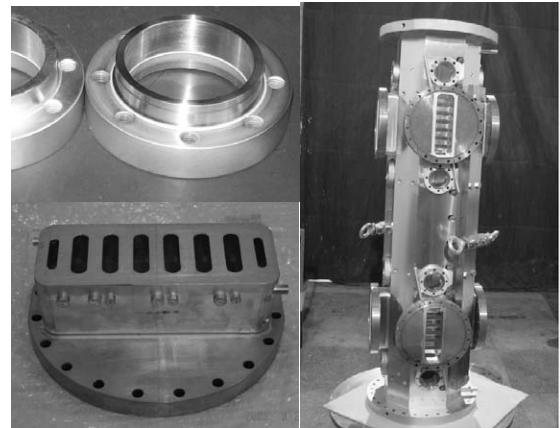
The 1.2m long full size model for brazing test with tuner and vacuum flanges.
